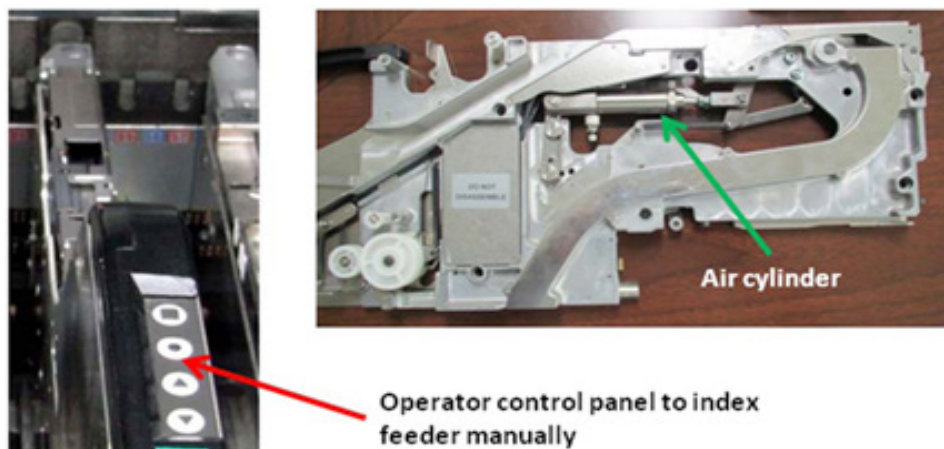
Examples of an electric feeder (left) and a pneumatic feeder (right) which are typically used in pick and place machines to advance the tape with LEDs.
